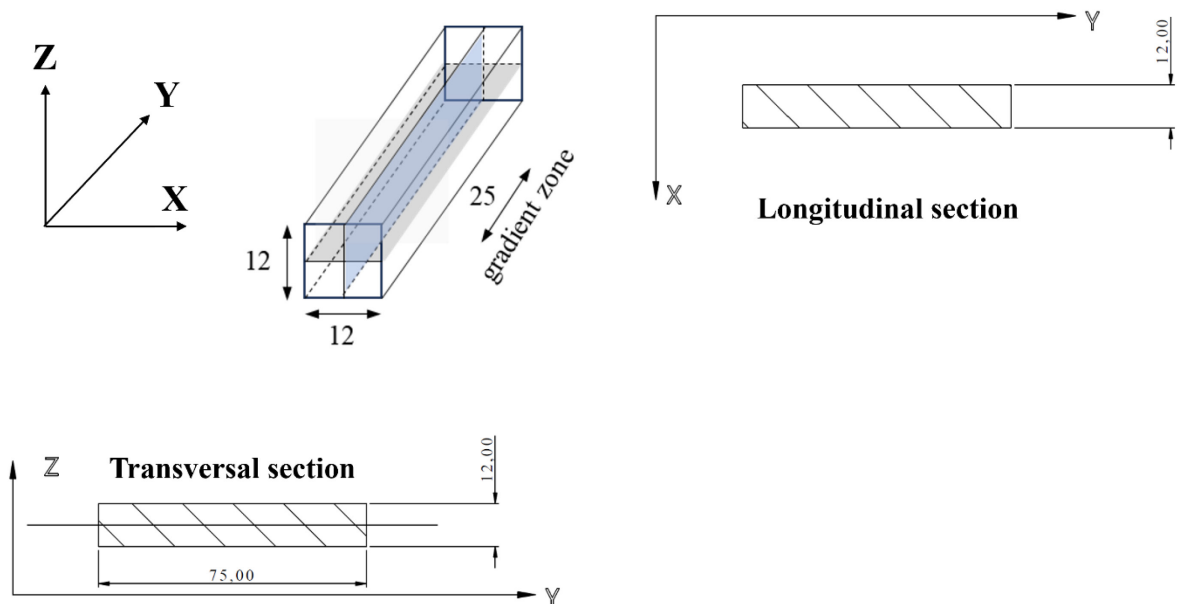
Cut-up plans made on the test specimens to create the survey sections.
